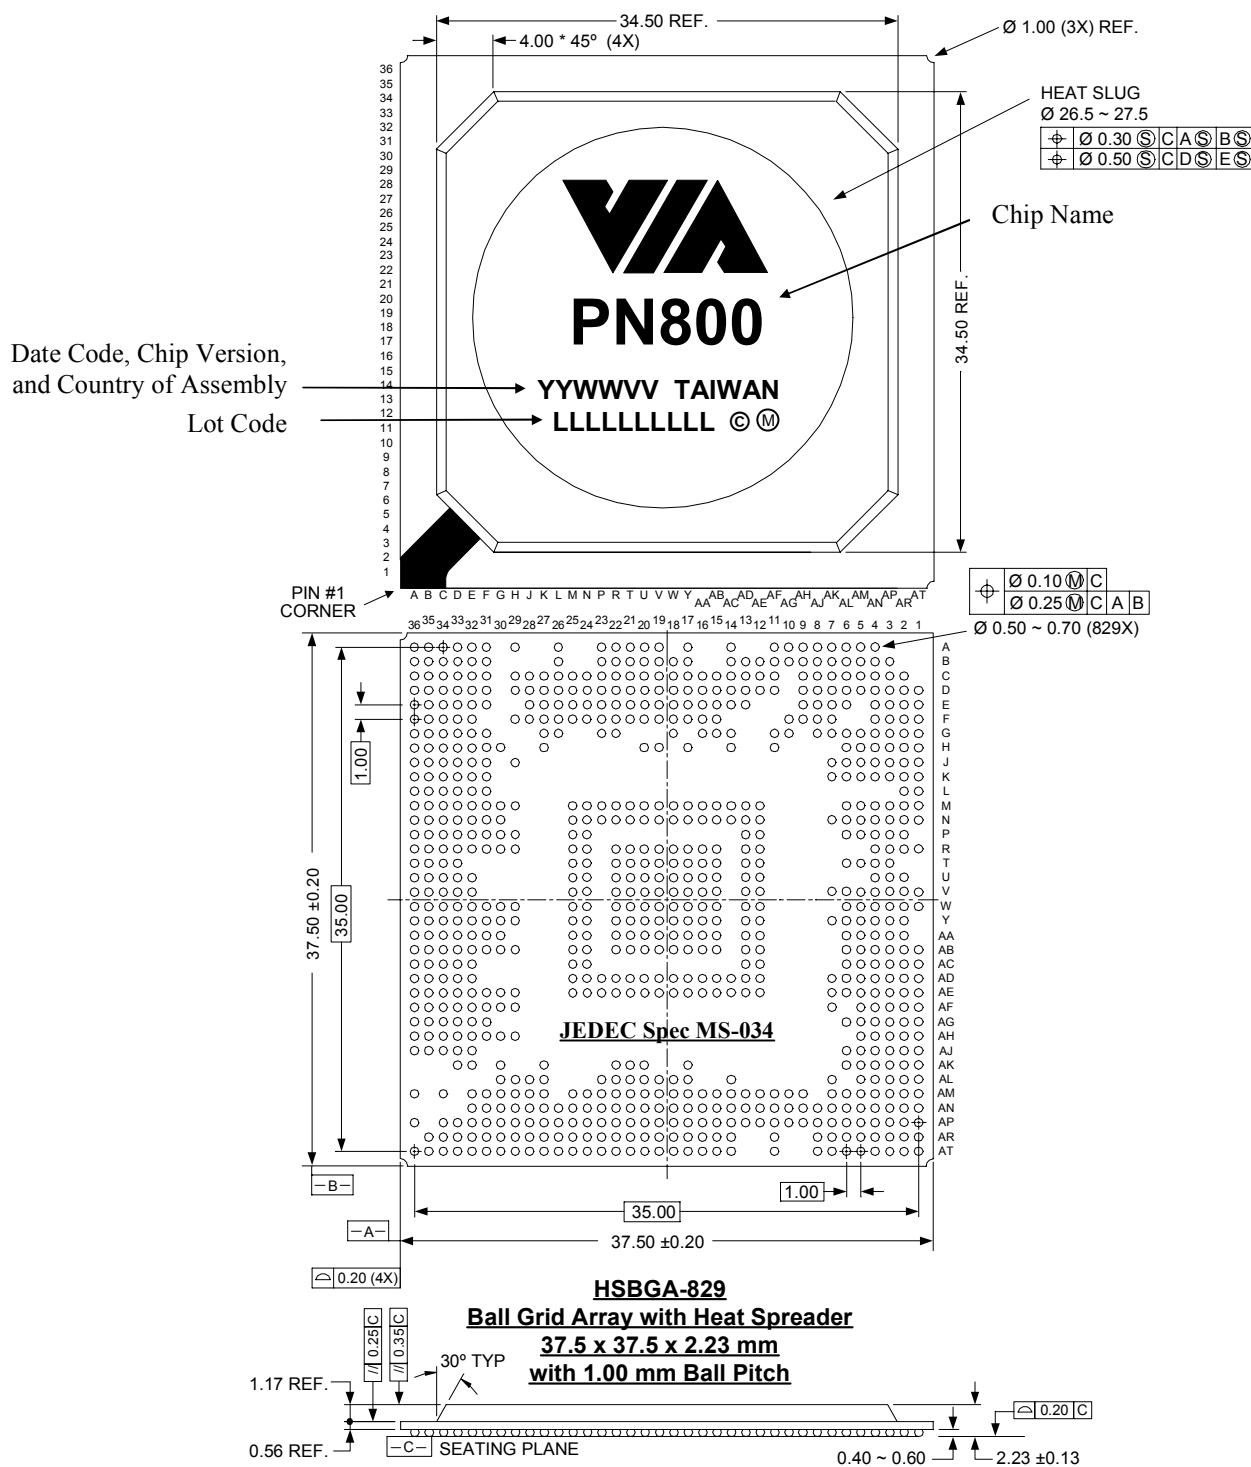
Mechanical Specifications – HSBGA-829 Ball Grid Array Package with Heat Spreader
